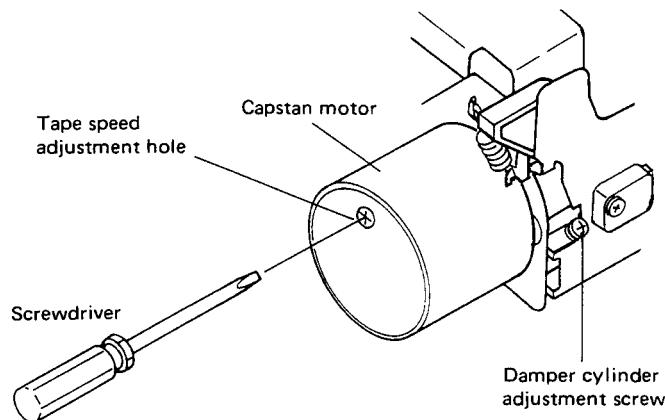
Tape speed and cassette pocket damper adjustment
